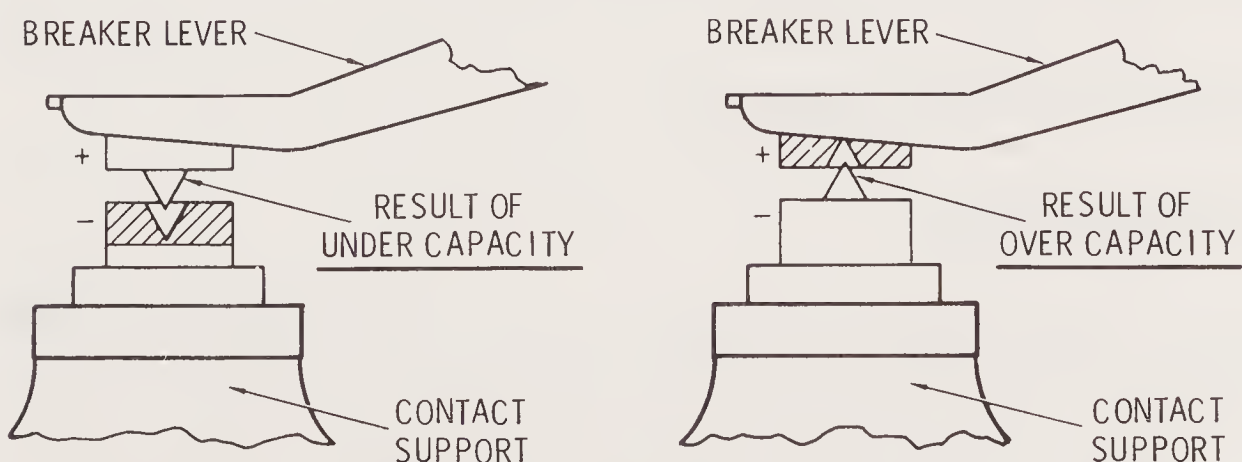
Pitting of breaker contacts due to condenser of wrong capacity.
